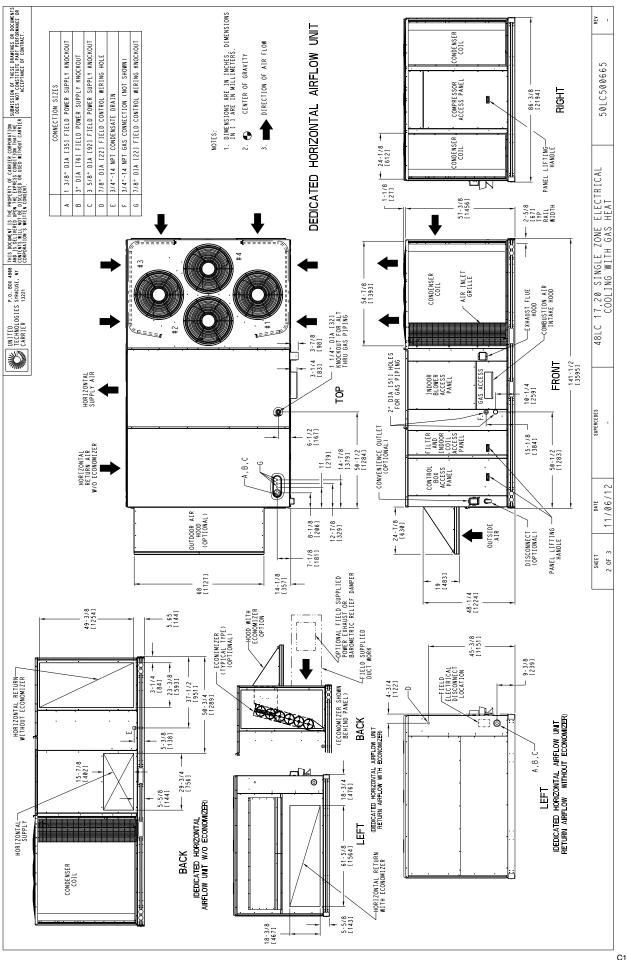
(cont.) - Unit Dimensional Drawing – 17 and 20 Size Units, Sheet 2 of 3
